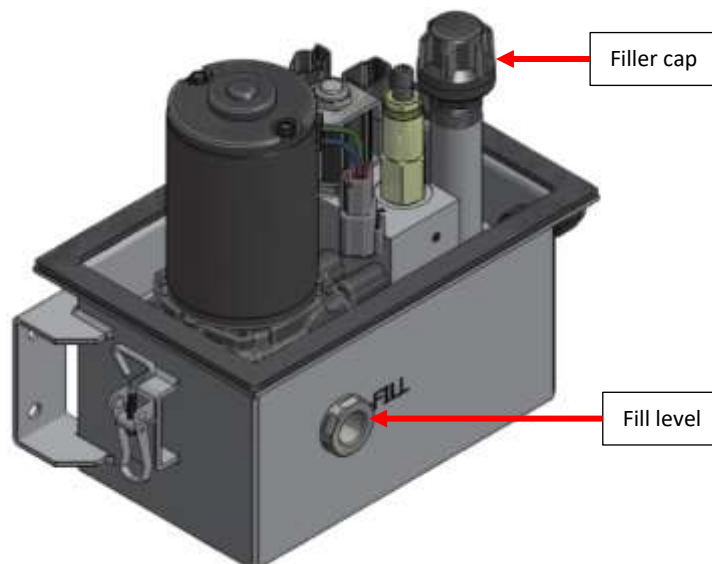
ABT™ Failsafe pump enclosure with lid removed.
